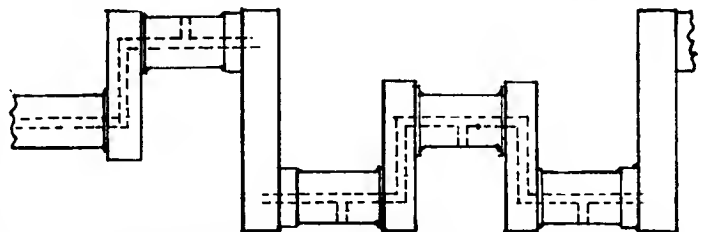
Section of crankshaft for four-cylinder motor, having three main bearings, and showing method of drilling crankshaft to lubricate connecting rod and bearings.
